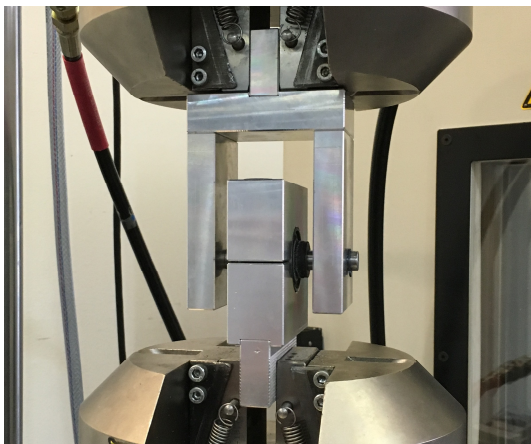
Experimental jig for rubber bushing under radial loading condition
